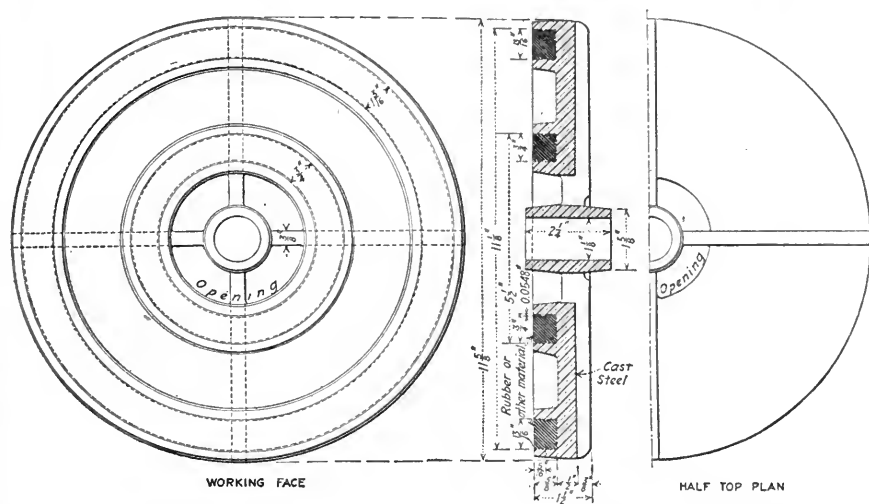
CAST-STEEL SKELETON VALVE TO HOLD RUBBER PACKING.
